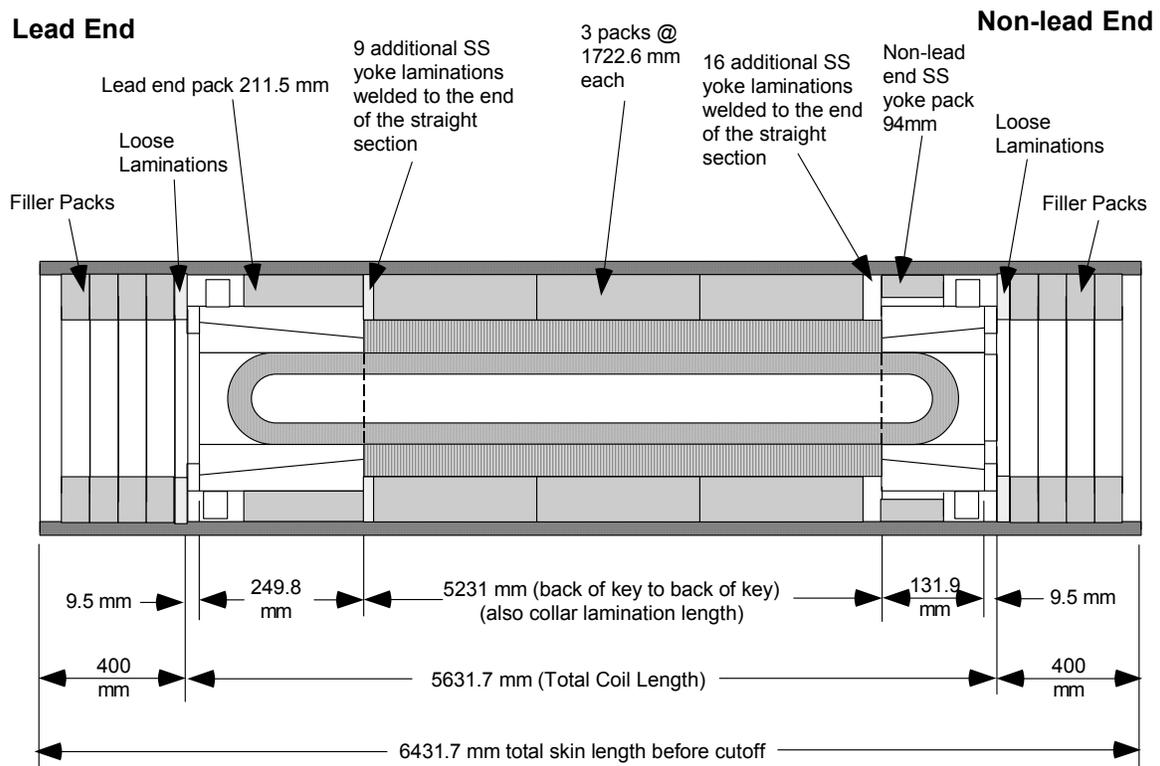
MQXB01 Yoke Assembly Configuration Before Welding
